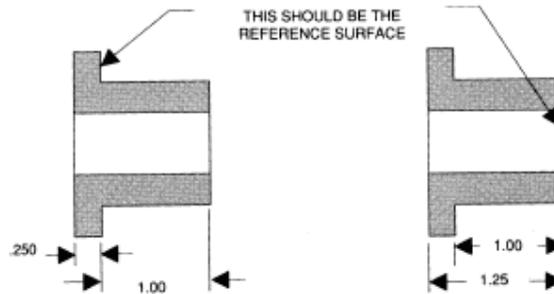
The best locating surfaces are often determined by the way that the part is dimensioned.
